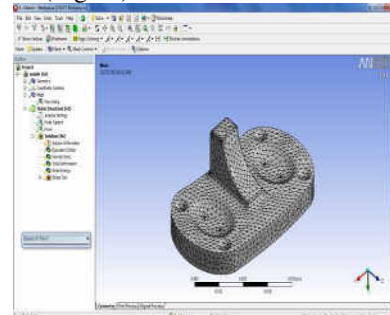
3D PRO-E models of Modifying Mobile bearing.
